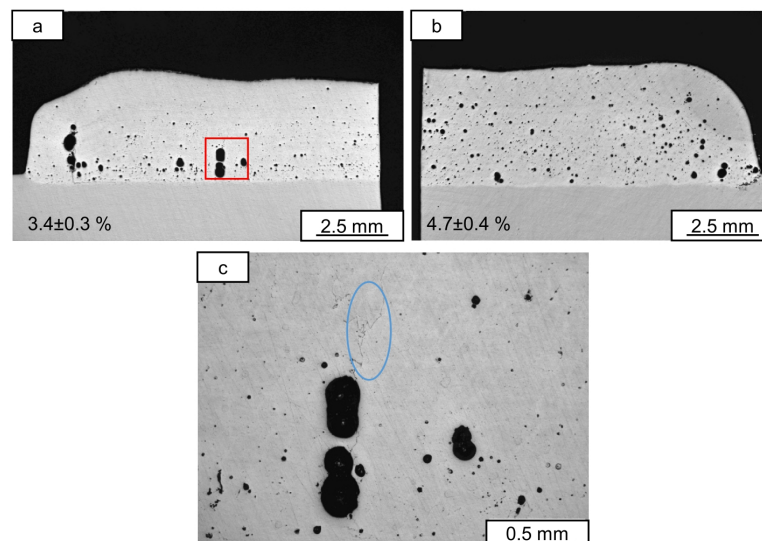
(a) Cross-section of the specimen from Fig. 11c cut by cutting plane 2; (b) cross-section of the specimen from Fig. 11d cut by cutting plane 2; (c) local magnification of the red bold line marked area in (a) and the crack is circled by the blue line. Porosity levels are noted in the lower-left corner. Specimens were cut by cutting plane 2. (For interpretation of the references to colour in this figure legend, the reader is referred to the web version of this article.)
